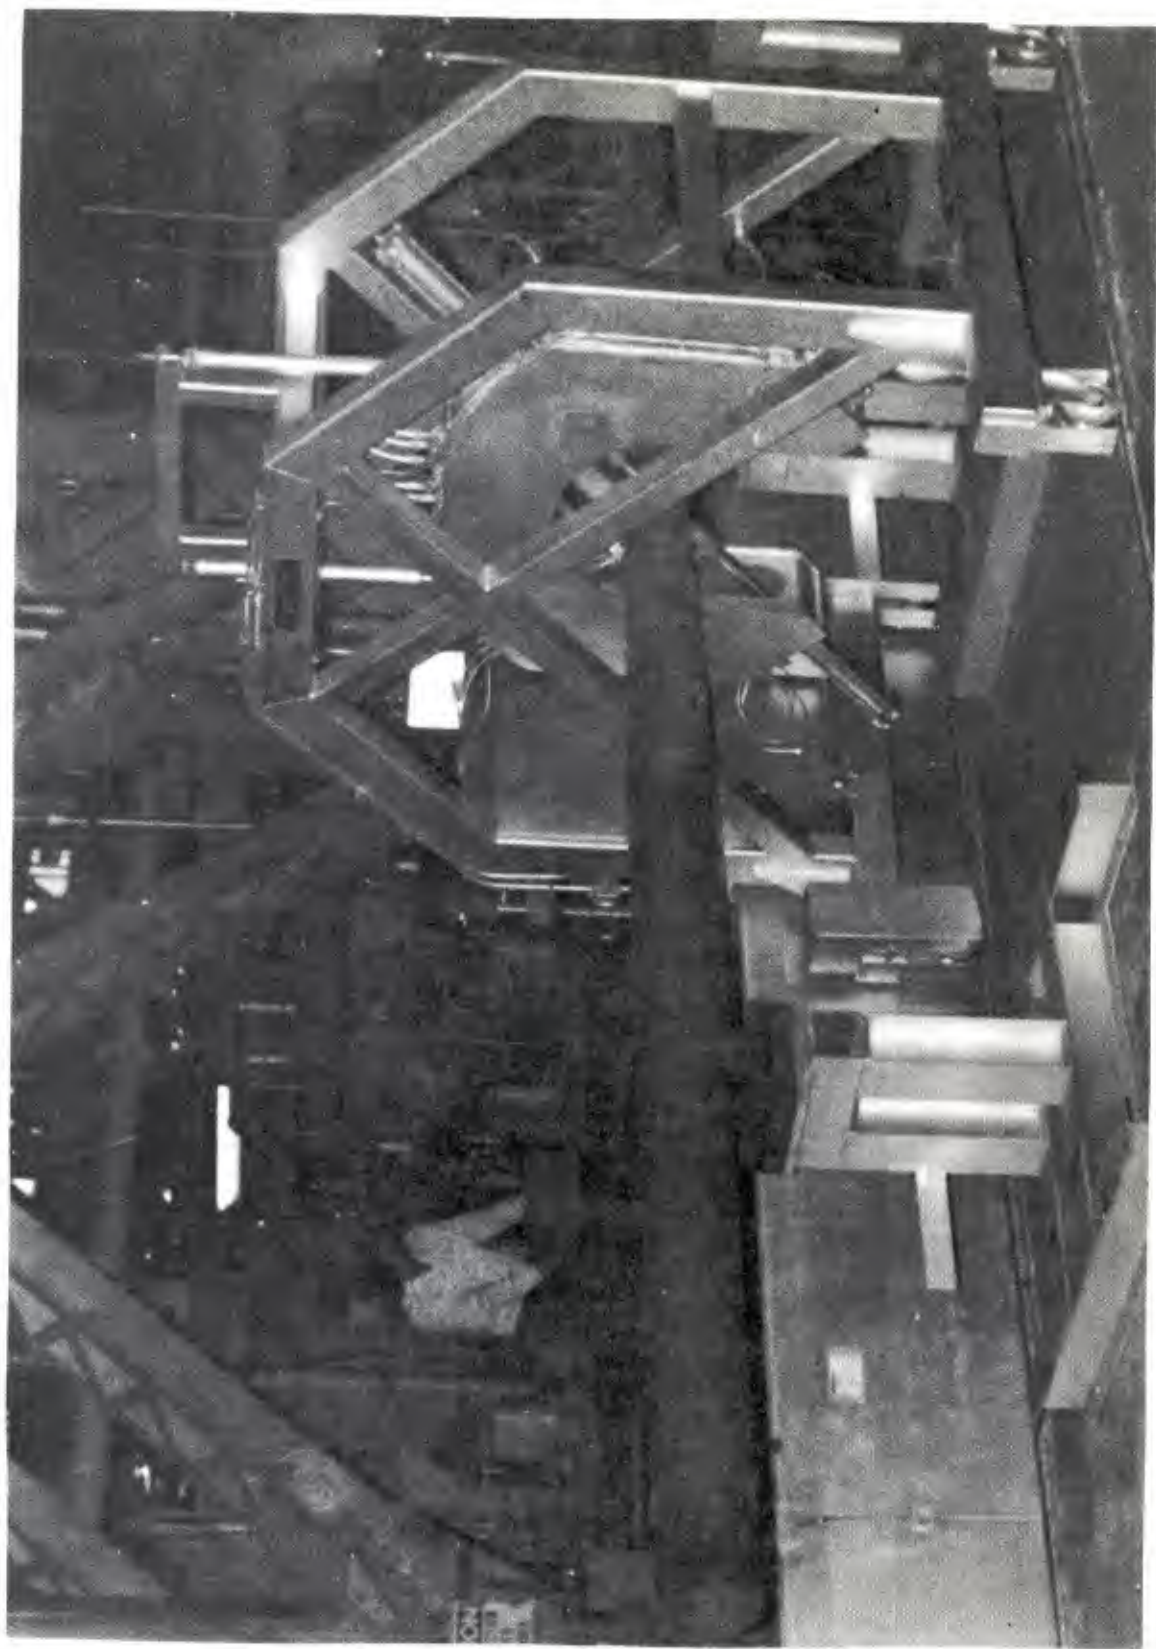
HOT FORGING IN INSPECTION STATION
